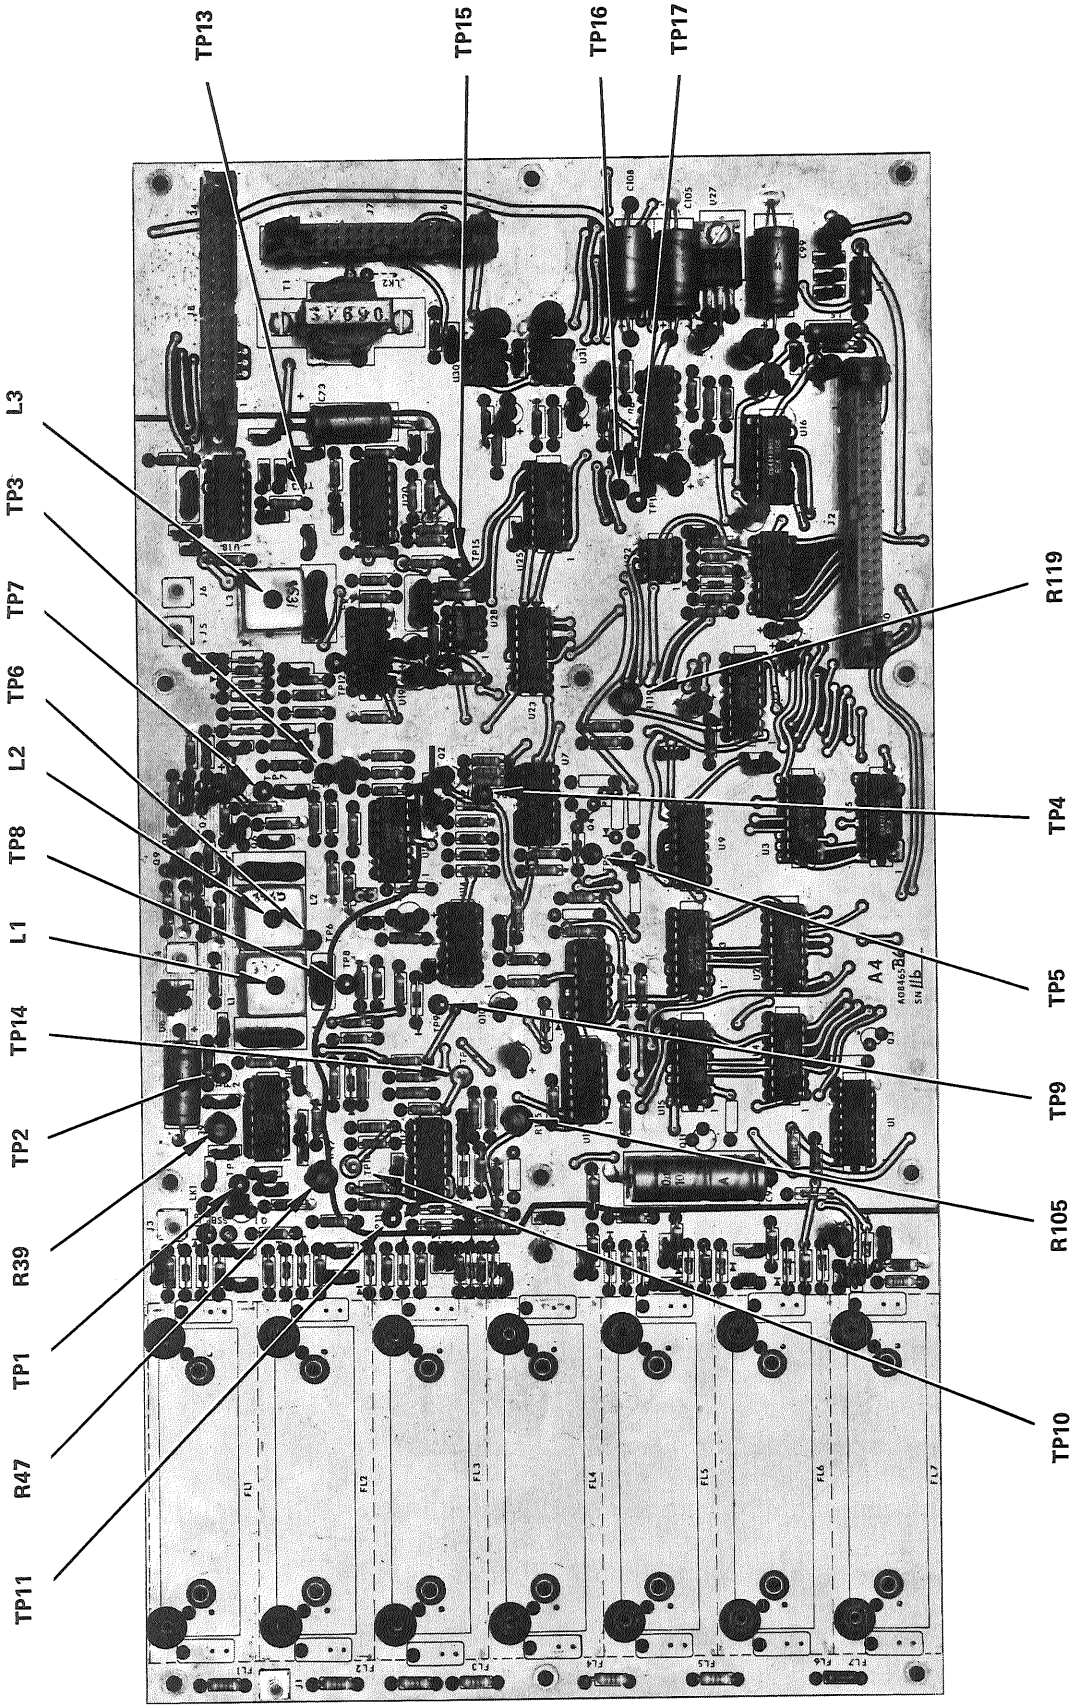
A. Main IF/AF Circuit Card Assembly A4
